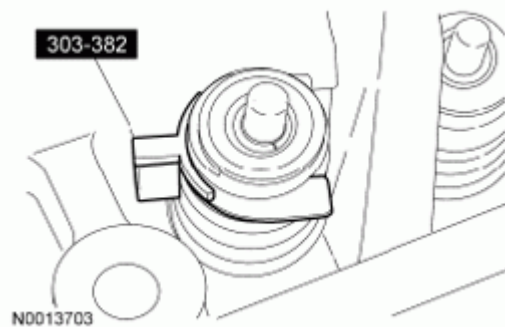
Identifying Valve Spring Compressor (303-581)
